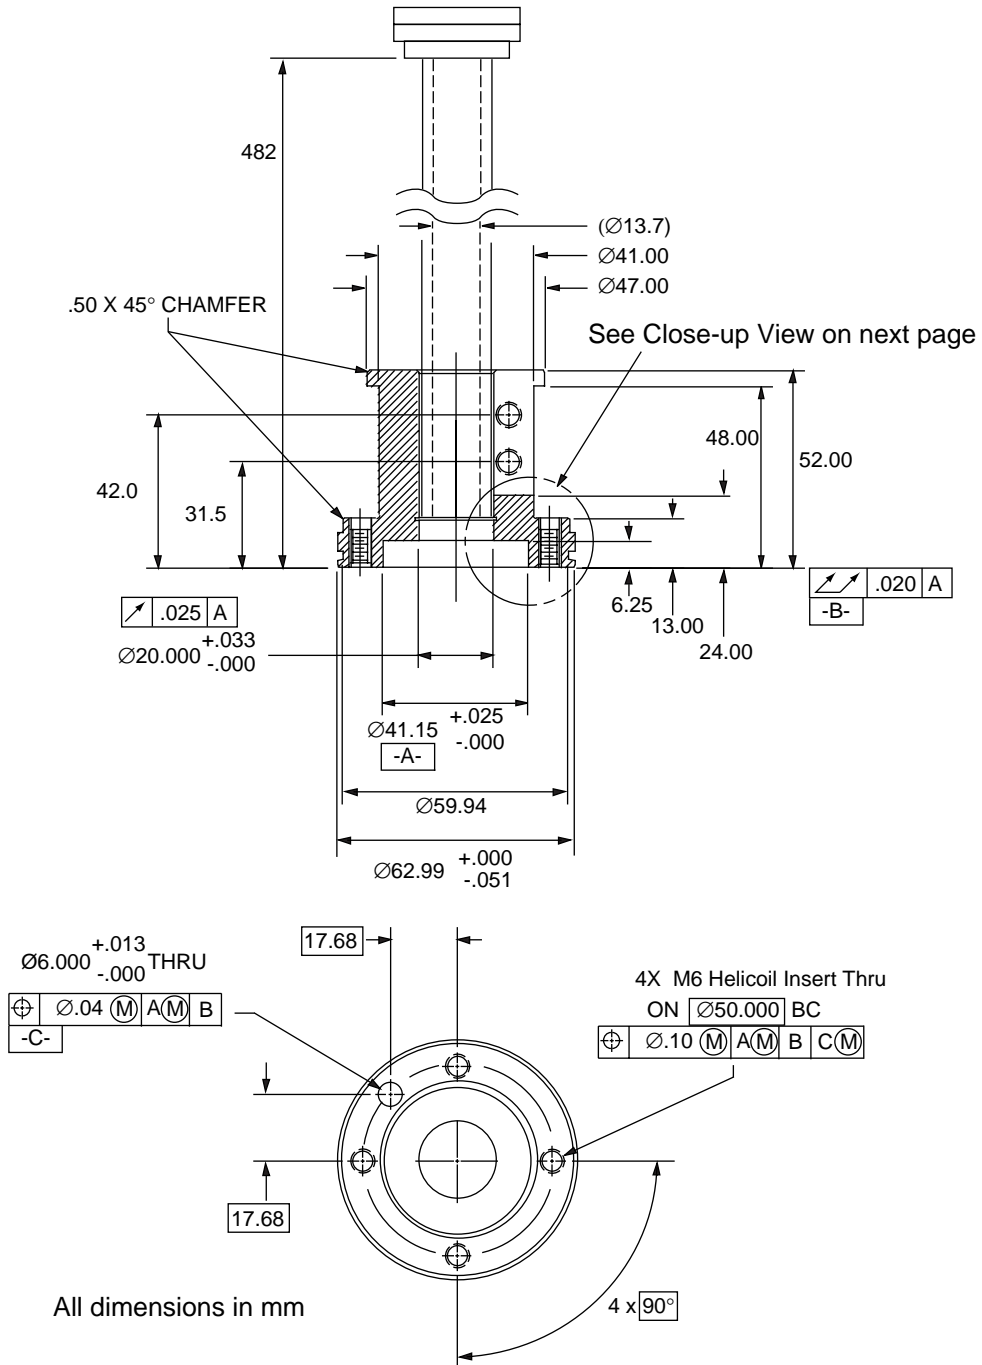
User Flange Dimensions for Adept 550 Robot
